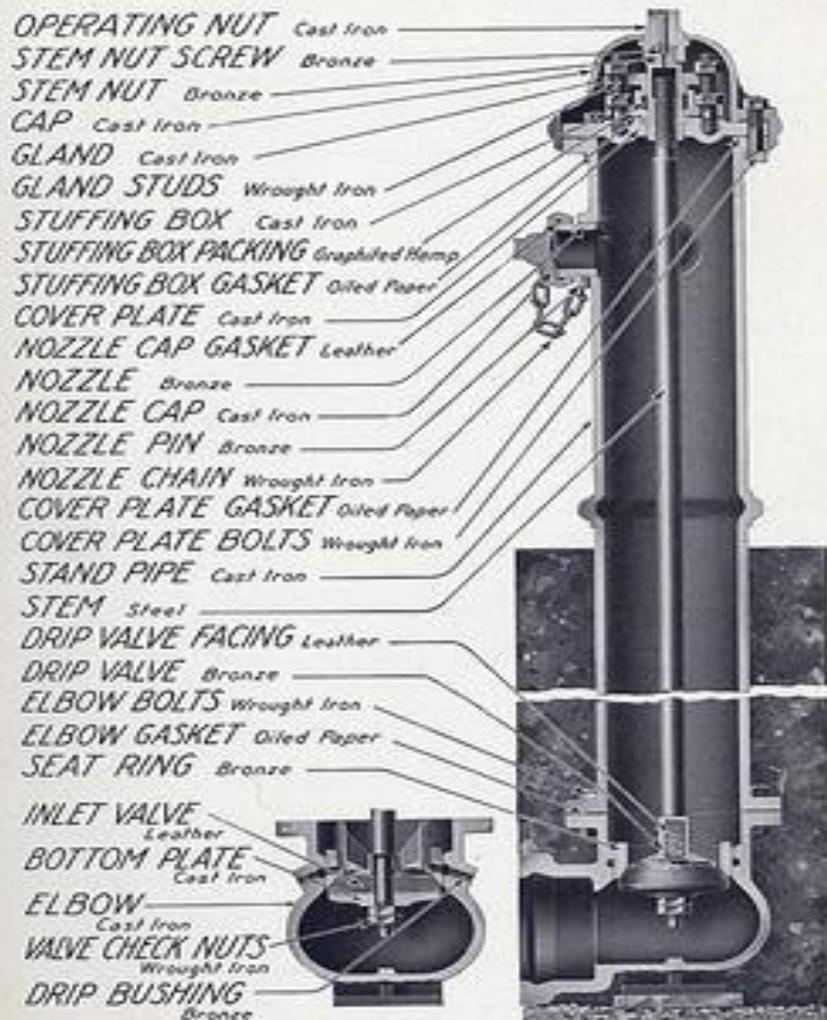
Schematic of typical dry-barrel fire hydrant.
